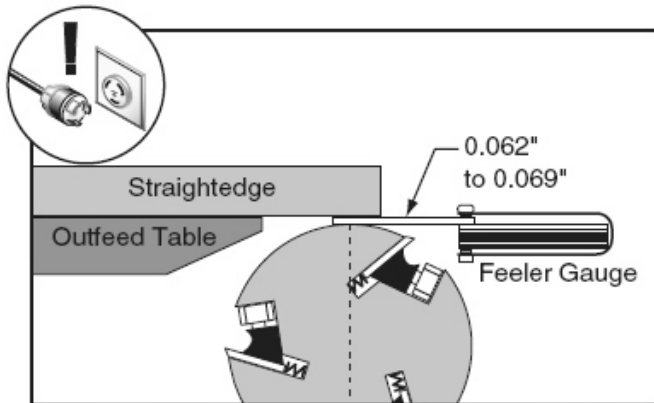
Using feeler gauge to check outfeed table–cutterhead height.
